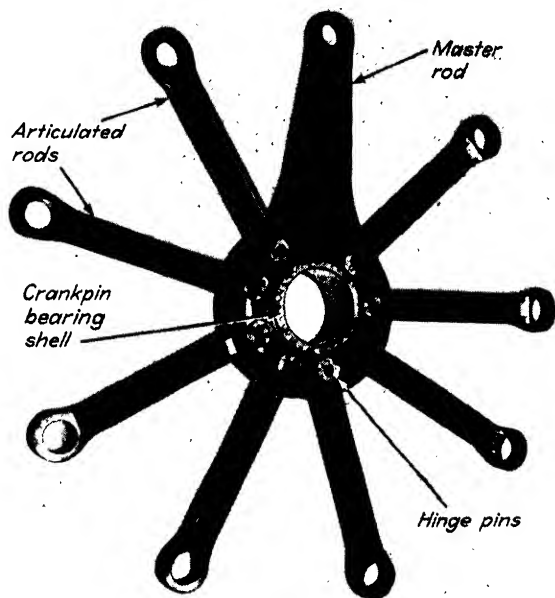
Master and articulated connecting rods of the Wright 18-cylinder engine. (Wright Aeronautical Corporation.)
